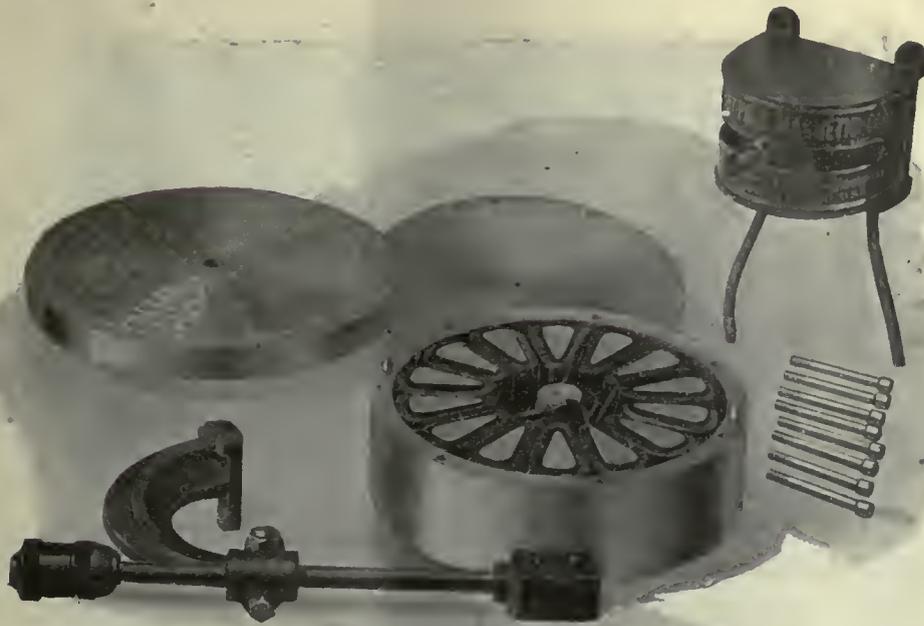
Complete disassembled view of Simmons Unit-Pole Magnetic Rotary Chuck.
